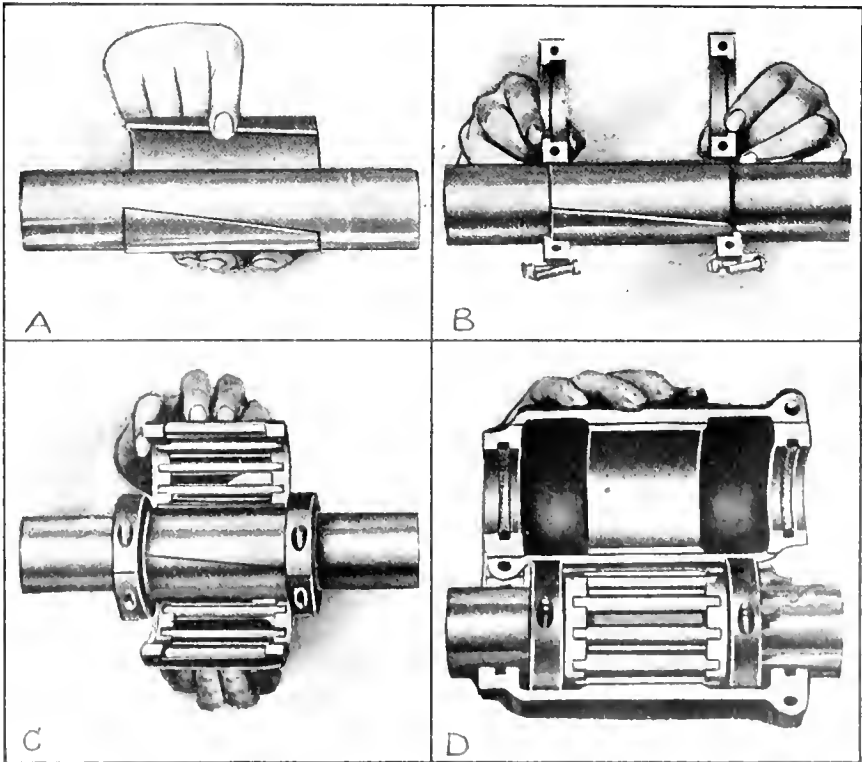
Assembling a Single Cage Sells Roller Bearing in Place
